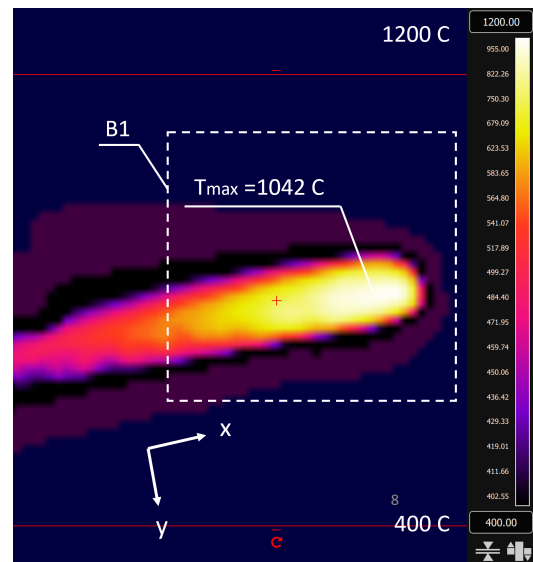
Thermal image specimen 3 1.8s after welding
